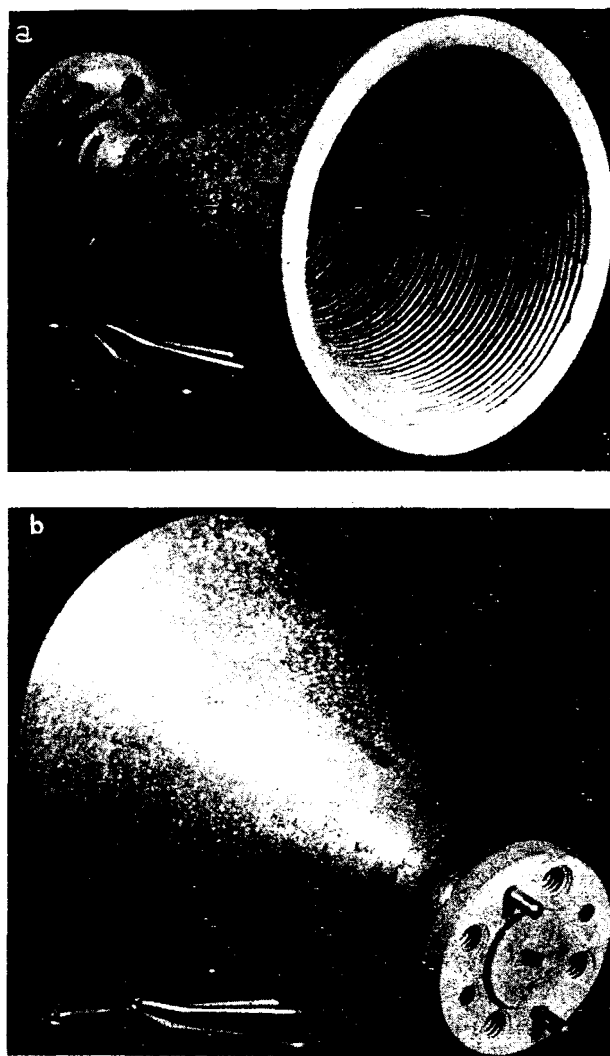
Corrugated horn electroformed by the procedure described in this paper: (a) View showing the transverse grooves on the inner surface; and (b) View showing the integral flange and the rectangular opening in it
